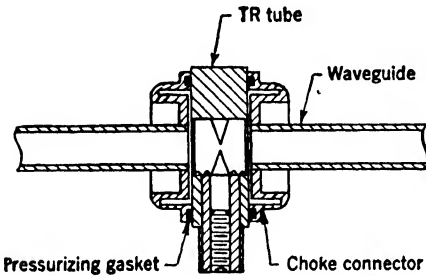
Integral-cavity TR tube mounted between waveguide choke connectors.
